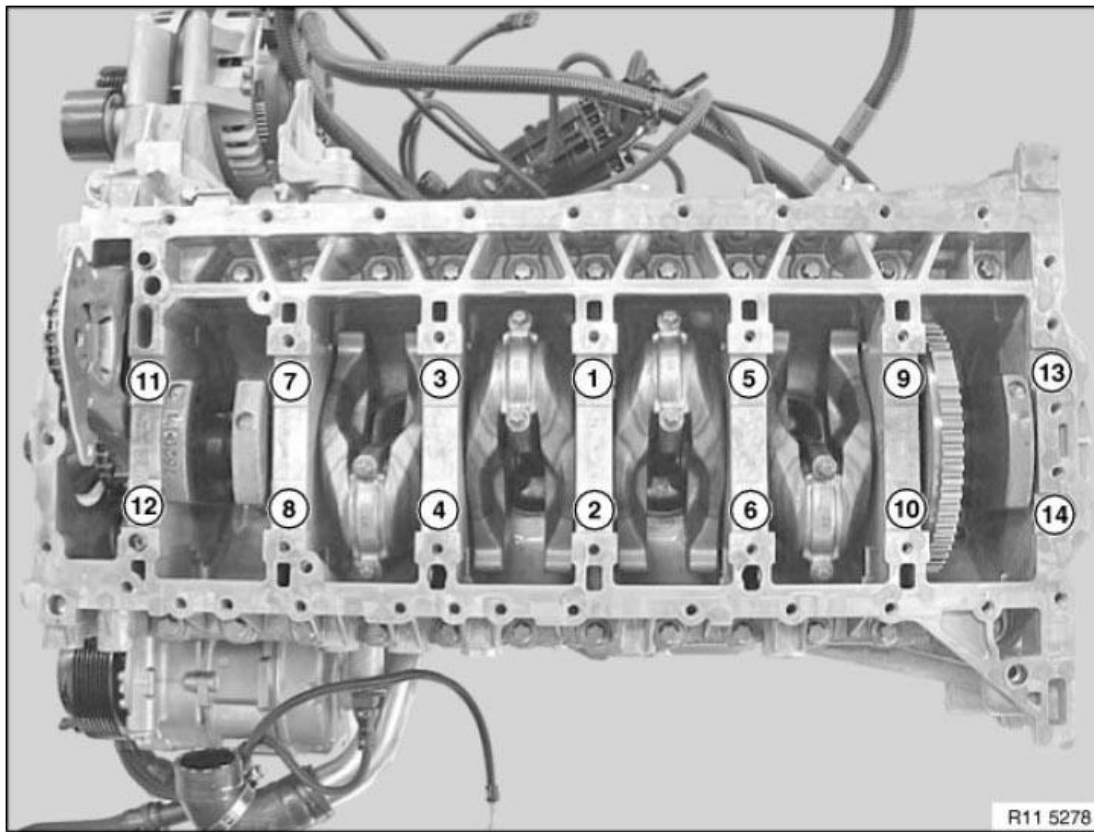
Identifying M10 Crankcase Bolts Tightening Sequence
